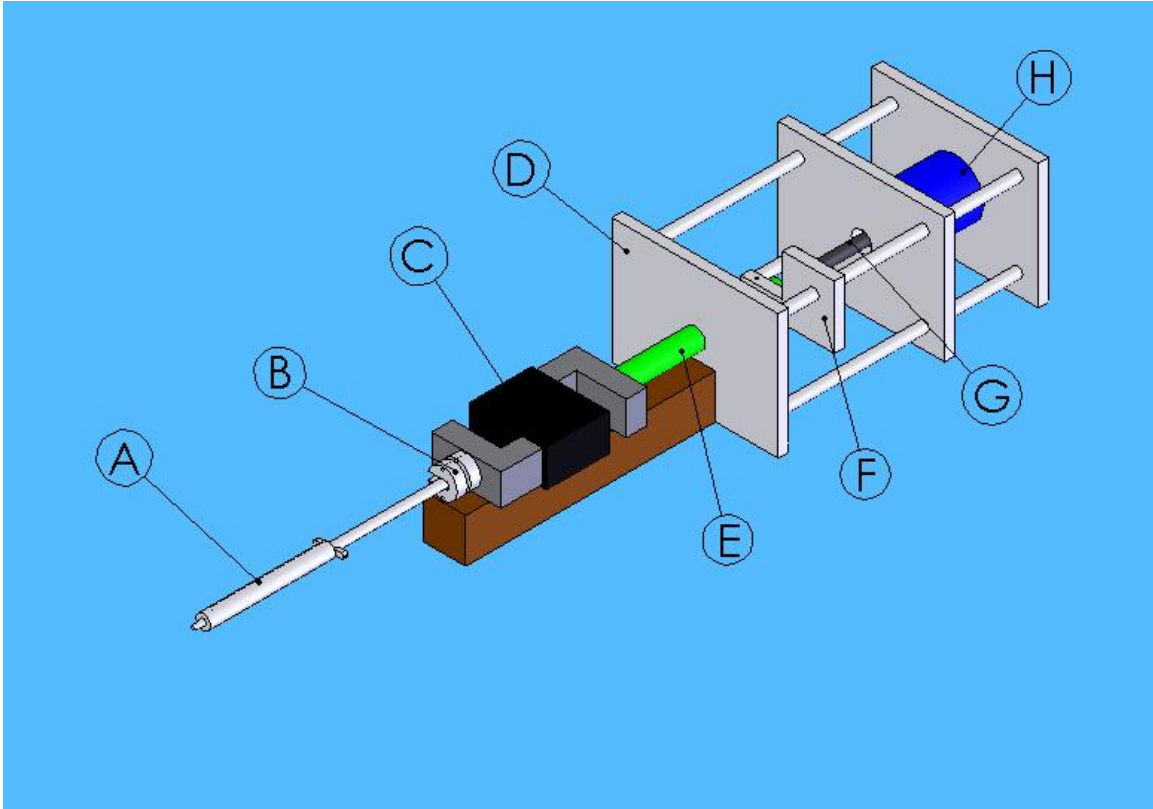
Syringe scaffolding for fluid delivery. (A) Syringe. (B) Syringe plunger holder. (C) Load cell. (D) Aluminum scaffolding. (E) Aluminum rod. (F) Key. (G) Threaded rod. (H) Stepper motor.
